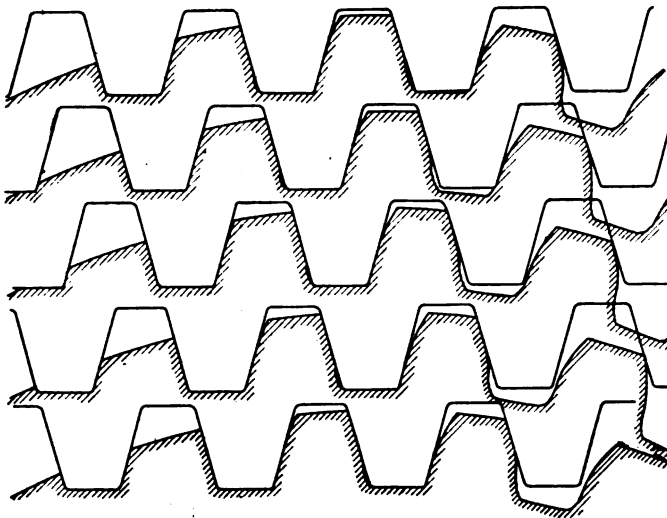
OUTLINE OF A GEAR PRODUCED BY THE HOBGING METHOD
